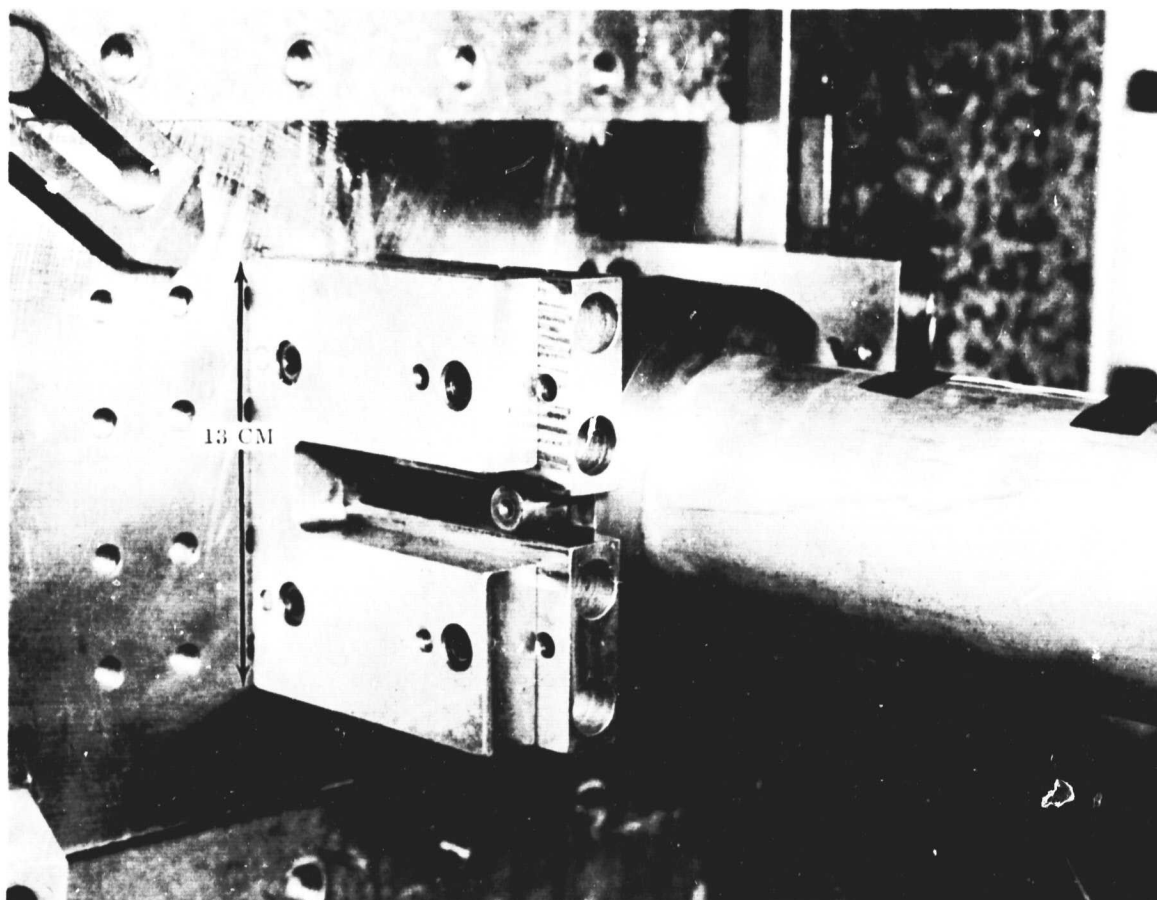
WALL-MOUNTED FIXTURE FOR DUCT END
